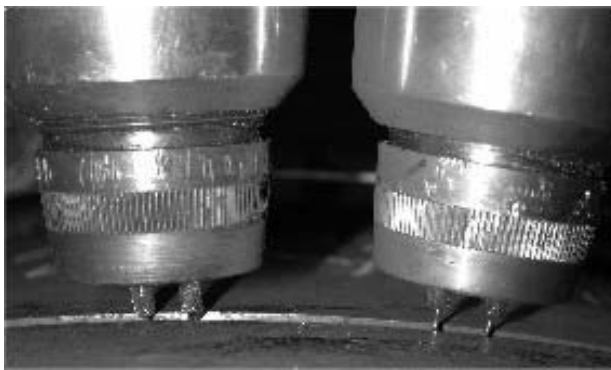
Spacing of CAPS dual-tandem welding torches
